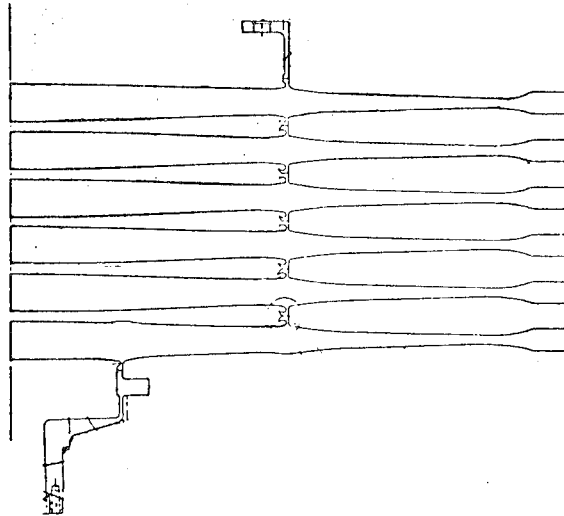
Inertia Welded Flywheel Rotor
